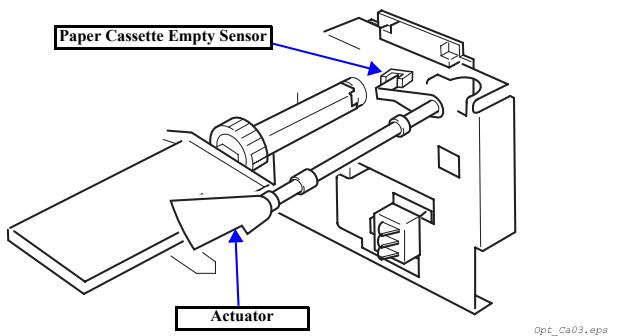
Paper Cassette Empty Sensor (Lower Cassette)
